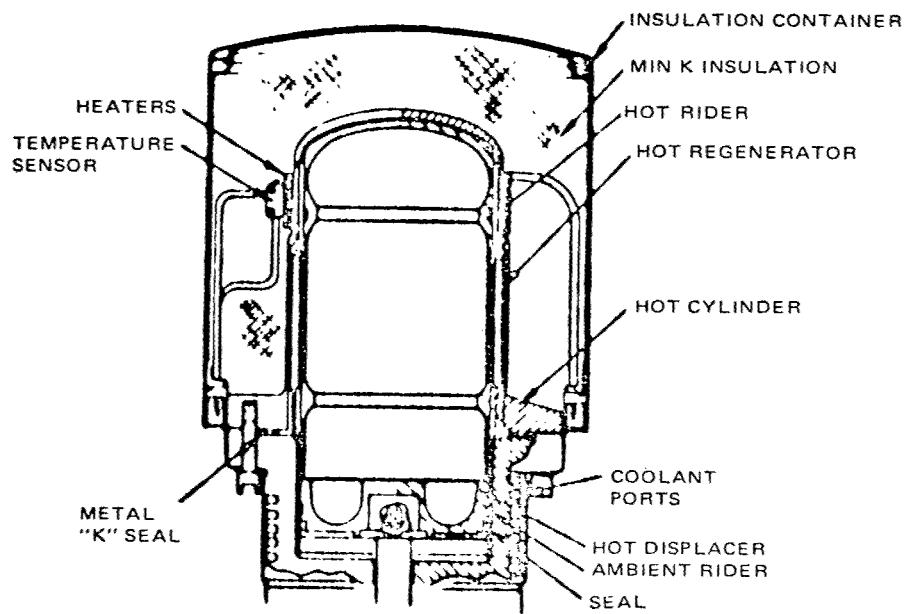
Cutaway view of VM refrigerator hot displacer area
